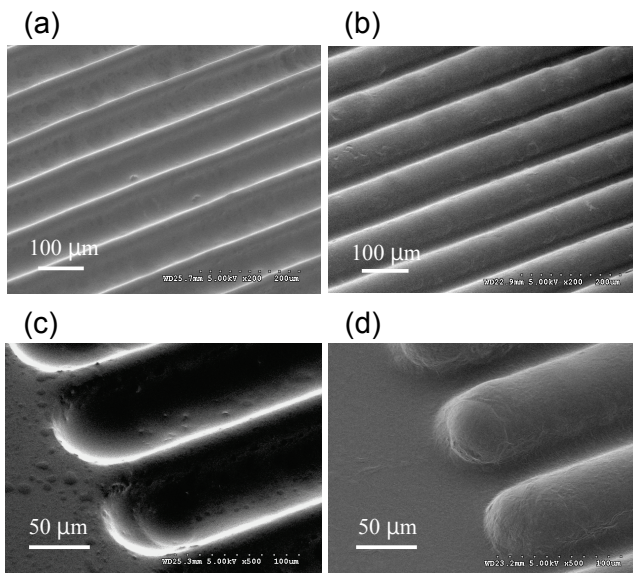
SEM images of microstructure line arrays: (a) glass mold with middle part, (b) the molding of Fig. 6(a), (c) glass mold with end part, and (d) the molding of Fig. 6(c).
